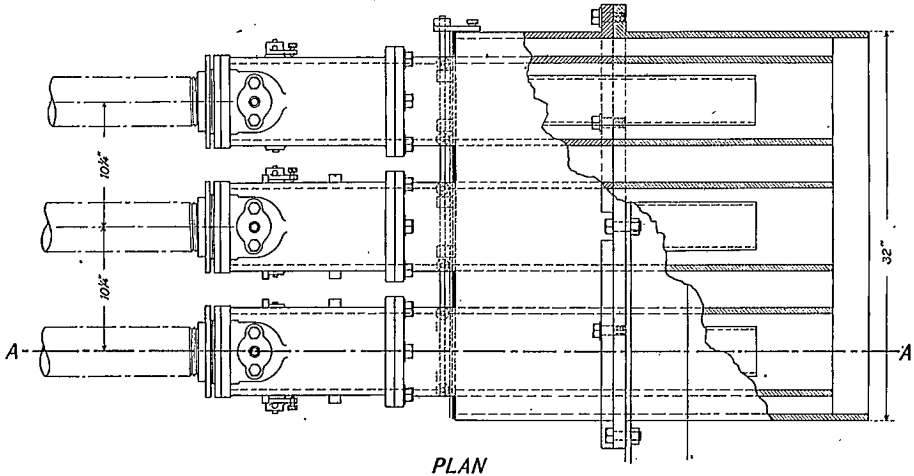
Assembly of horizontal burner, type B, Pulverized Fuel Equipment Company.
